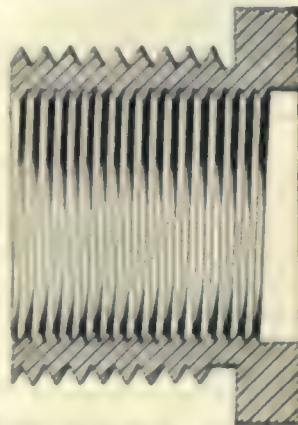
CHUCK ADAPTER FOR SMALL LATHE
